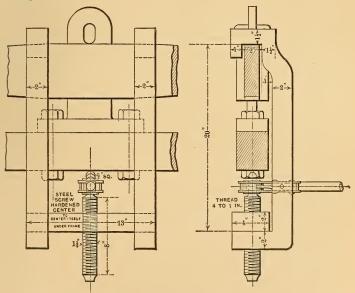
Clamp for Removing Gib in Spring Equalizer.
